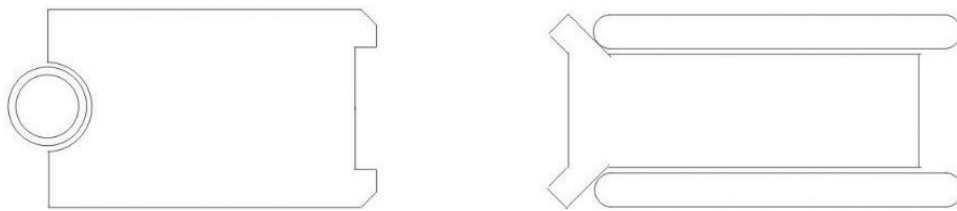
Oil control ring: two-piece oil control ring (left), three-piece oil control ring (right).
